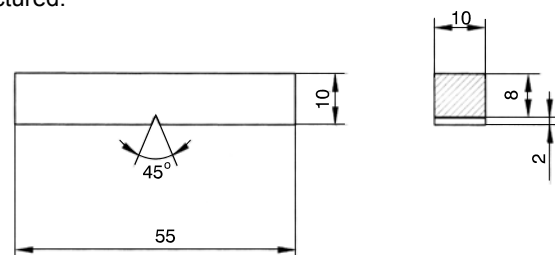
Shape and dimensions of Charpy - V notch specimen
